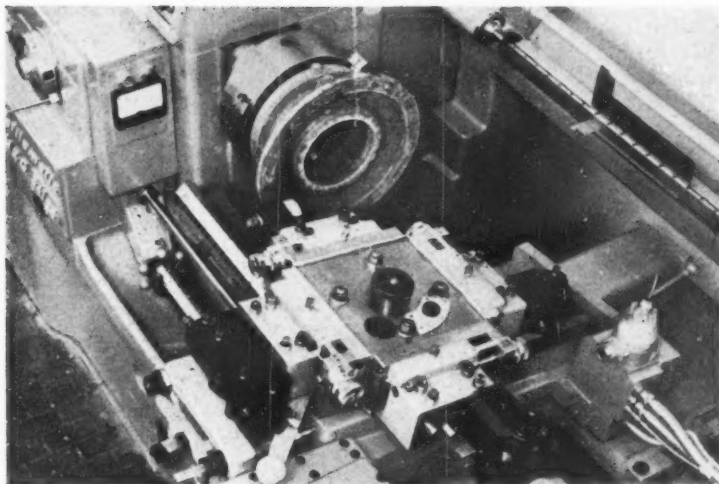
Close-up view of the Maxnovo Profilomatic 341-25 hydraulic copying lathe, showing the 4-station indexing tool turret
